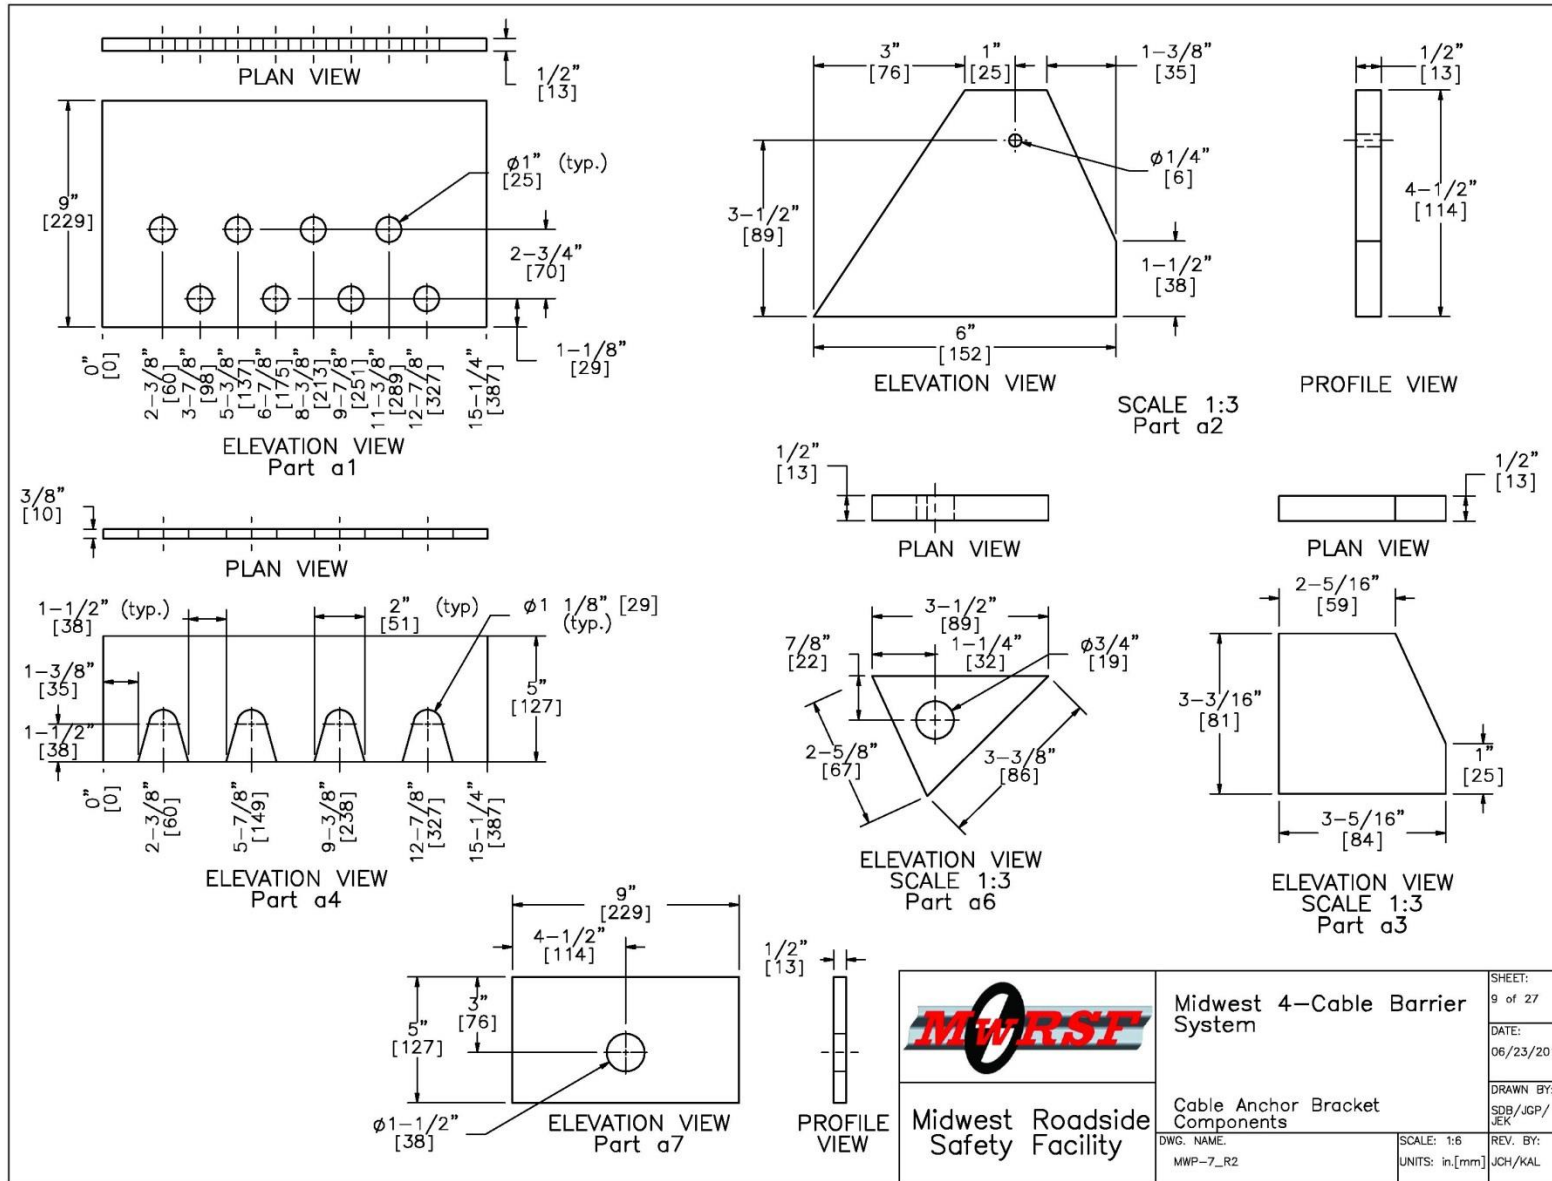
Cable Anchor Bracket, Test No. MWP-7
